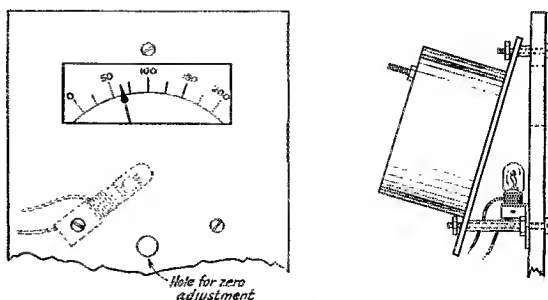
A method of mounting meters for indirect illumination. It also removes danger of contact with the adjusting screw when the meter is in a high-voltage circuit.
